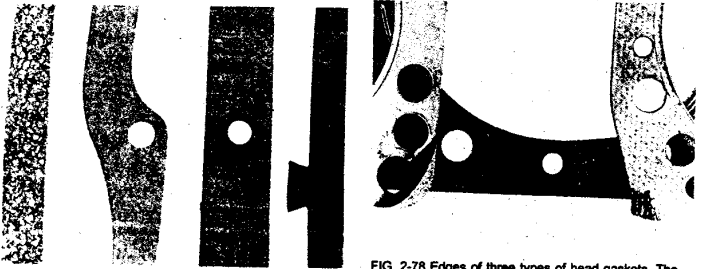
From left to right: cork, paper, composite, and elastomer gasket material.
